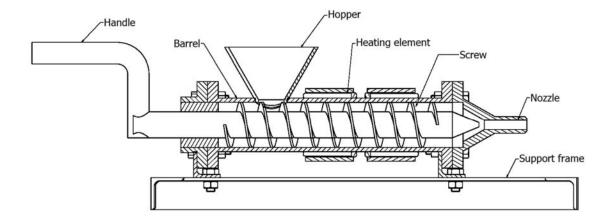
Main components of the fabricated hand operated plastic injection machine
